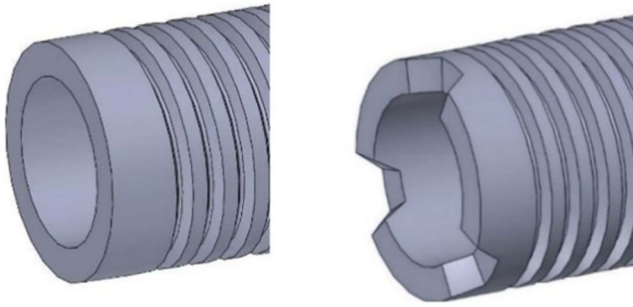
Illustration of the regular tool sleeve and the modified tool sleeve [76]
